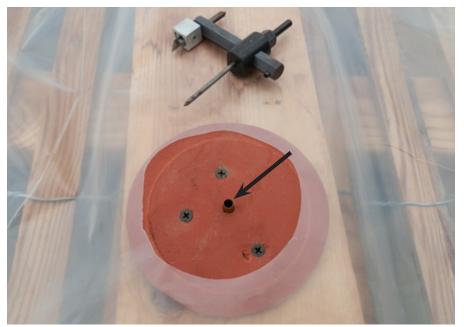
Completed hole in plastic suitable for 6-inch container bottom to set directly on capillary mat surface. To make the DeBerg Hole Cutter Jig, purchase a 1-inch by 6-inch by 6-foot board (the width of the bench). Starting at one edge, drill holes to accept insertion of ³/⁸-inch brass ferrules (hollow sleeve pieces shown by arrow) starting at one end — first 6 inches, and then every 12 inches for a total of 6 holes. This has the pots on 12-inch centers within the bench. A firm cutting surface is made by using hard floor tile or resistant material, which is either glued or screwed in and positioned at each location. An adjustable hole cutter is used to cut the holes by positioning the polyethylene firmly over the cutting board, inserting the center drill bit into the ferrules and turning the cutter by hand.
